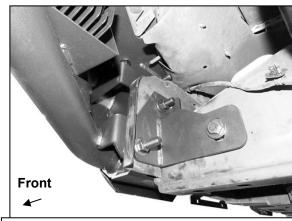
Hold Bumper up to end of frame. Guide Bolt Plates in Bumper through bumper bracket on frame and Support Brackets
